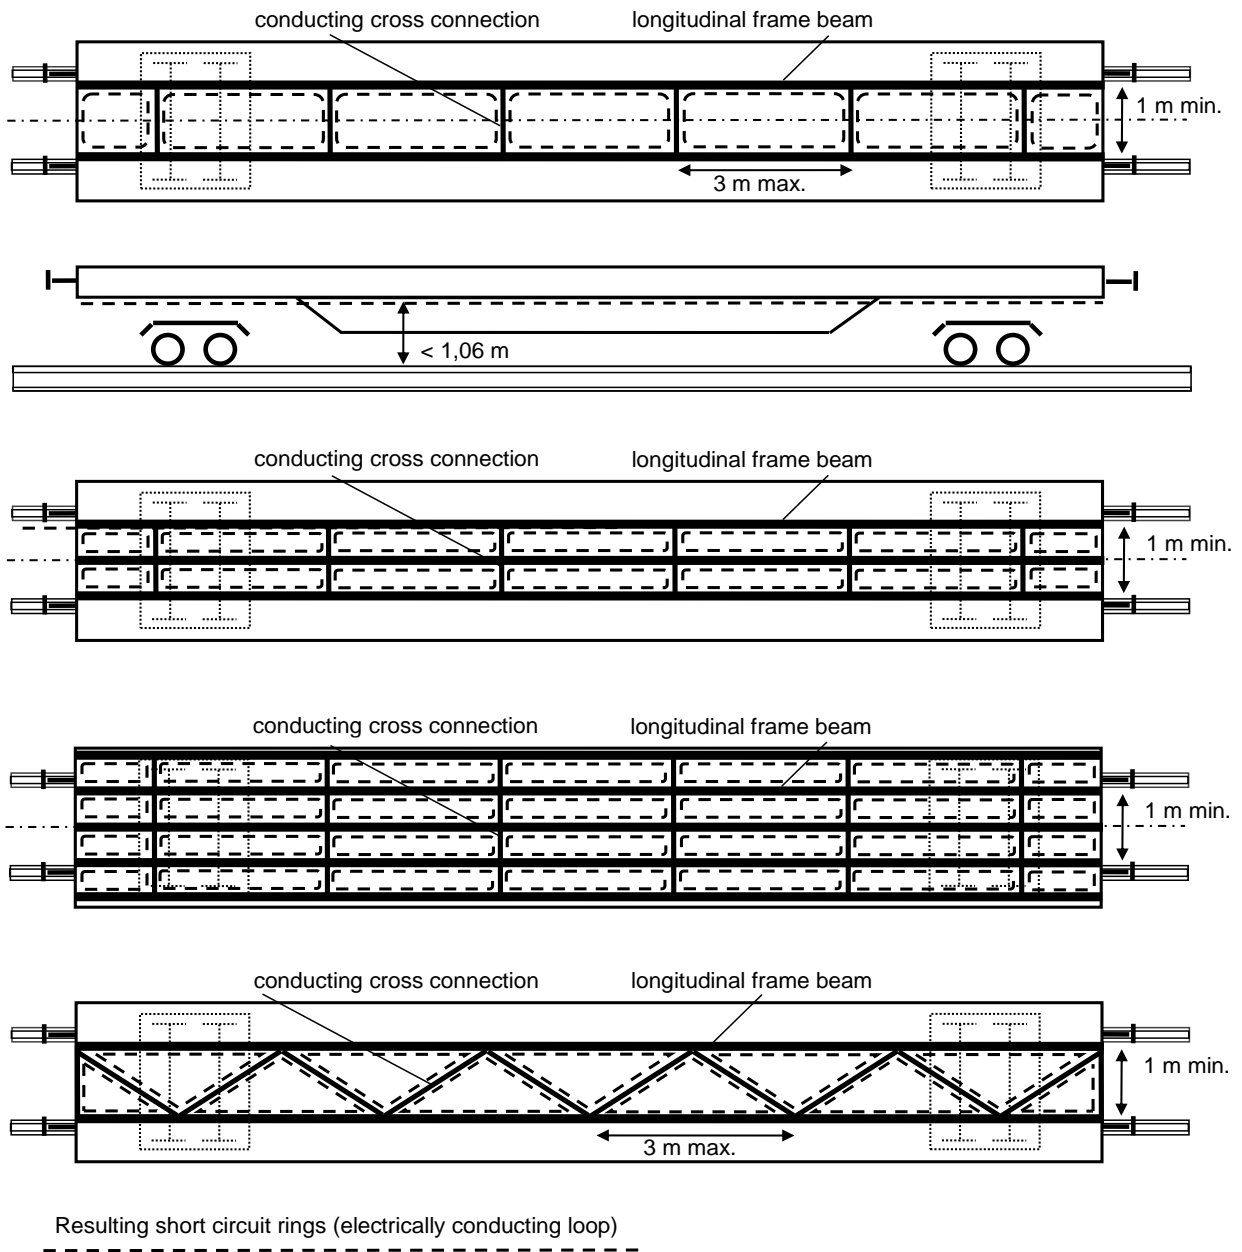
Examples for short circuit rings built by frame beams and cross connections
